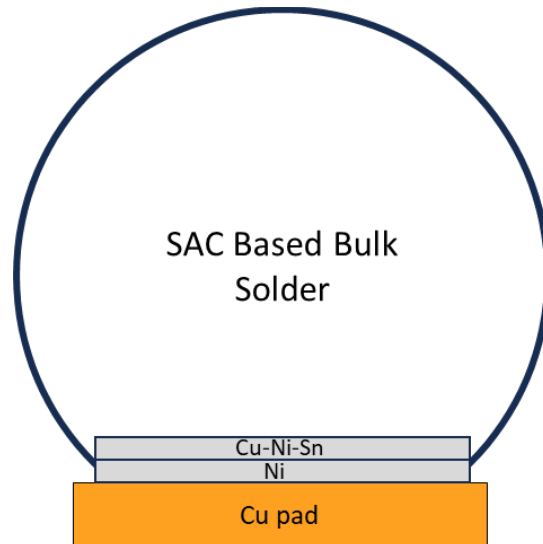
IMC of SAC-based solder with ENIG surface finish
